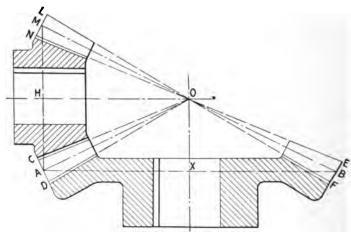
Directions for laying out bevel gears. Shafts at right angles. Gears selected. Gear 4P 24T, pinion, 12T. Scale halfsize.
